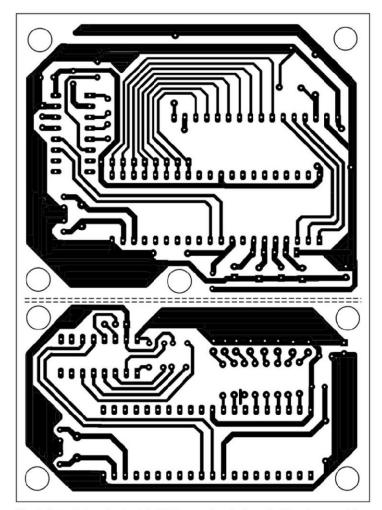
Actual-size, single-side PCB layout for the handheld unit comprising LCD module (above) and the control unit (below)
